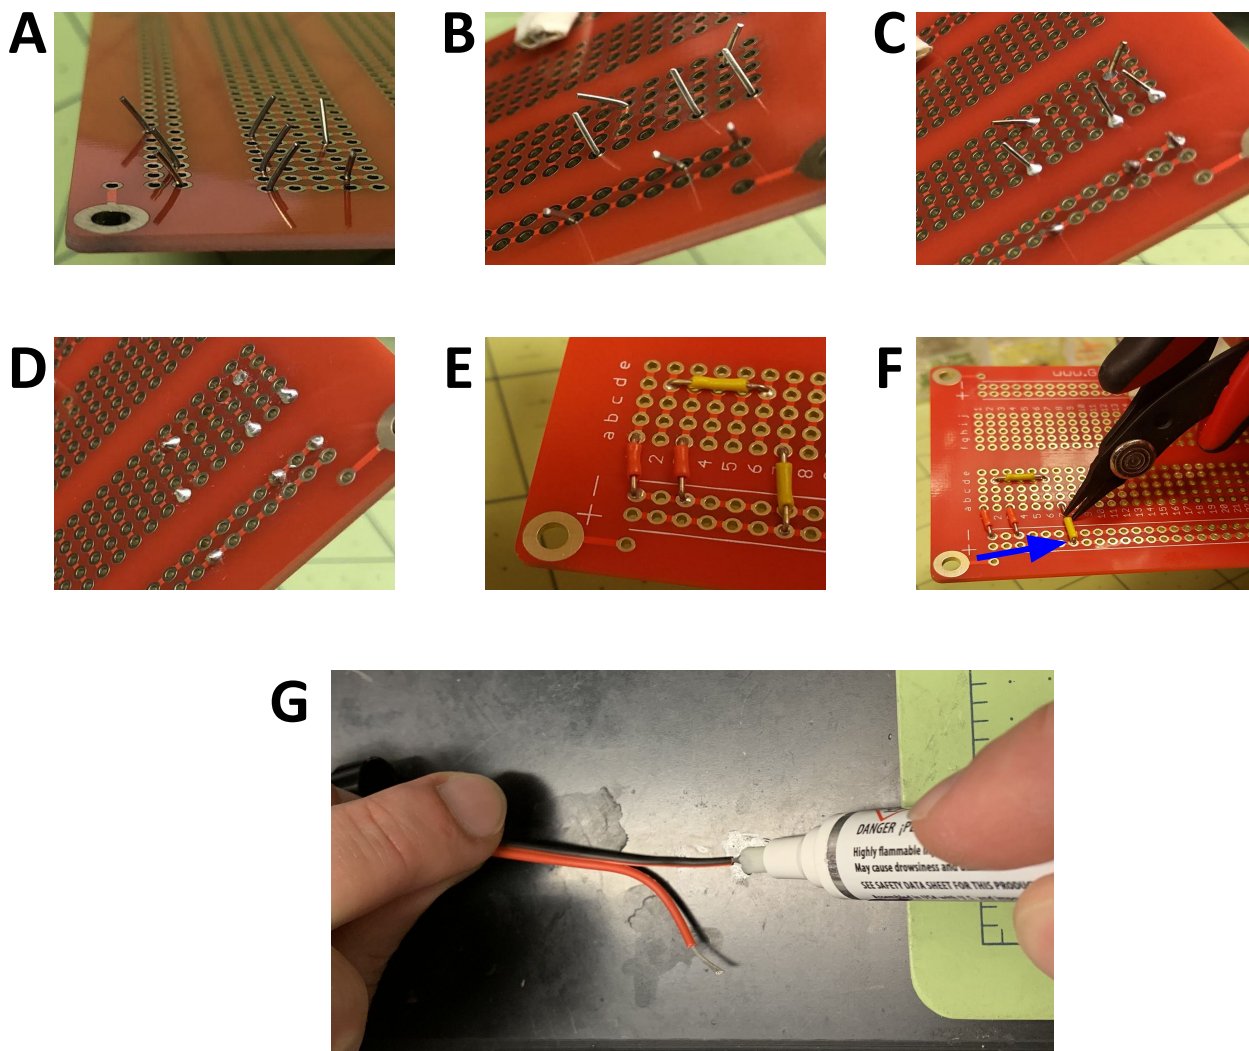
Soldering the wires onto the PCB. (A) Bend jumpers so that they make direct contact with the PCB and stay in place while soldering. (B) Another view of the bent wires. (C) Wires after soldering. (D) Trimmed wires on the PCB. (E) Shrunken insulation after heating with solder. (F) Moving the insulation into position to cover the ground through hole (blue arrow) (G) Adding flux to a wire end or terminal.
